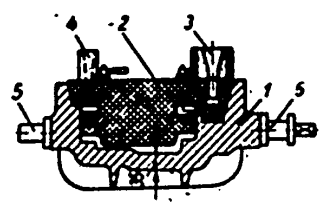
Shake-out Mold: 1) Lower Metal Part of Mold; 2) Upper Part, Sand Core; 3) and 4) Gate and Riser; 5) Pins for Rotation.
